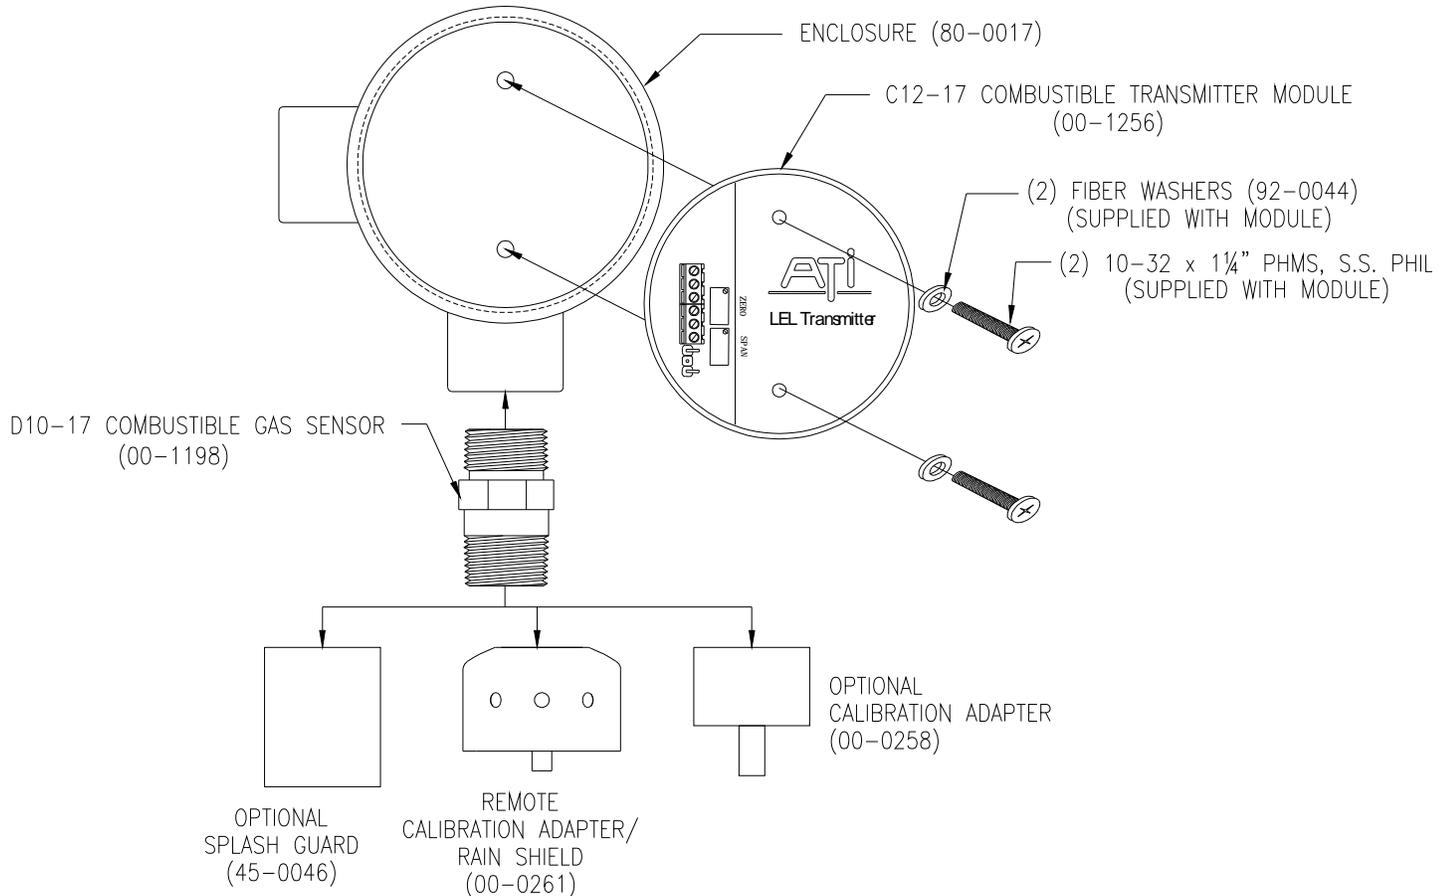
Standard Combustible Transmitter Exploded View (ATI-0146)
